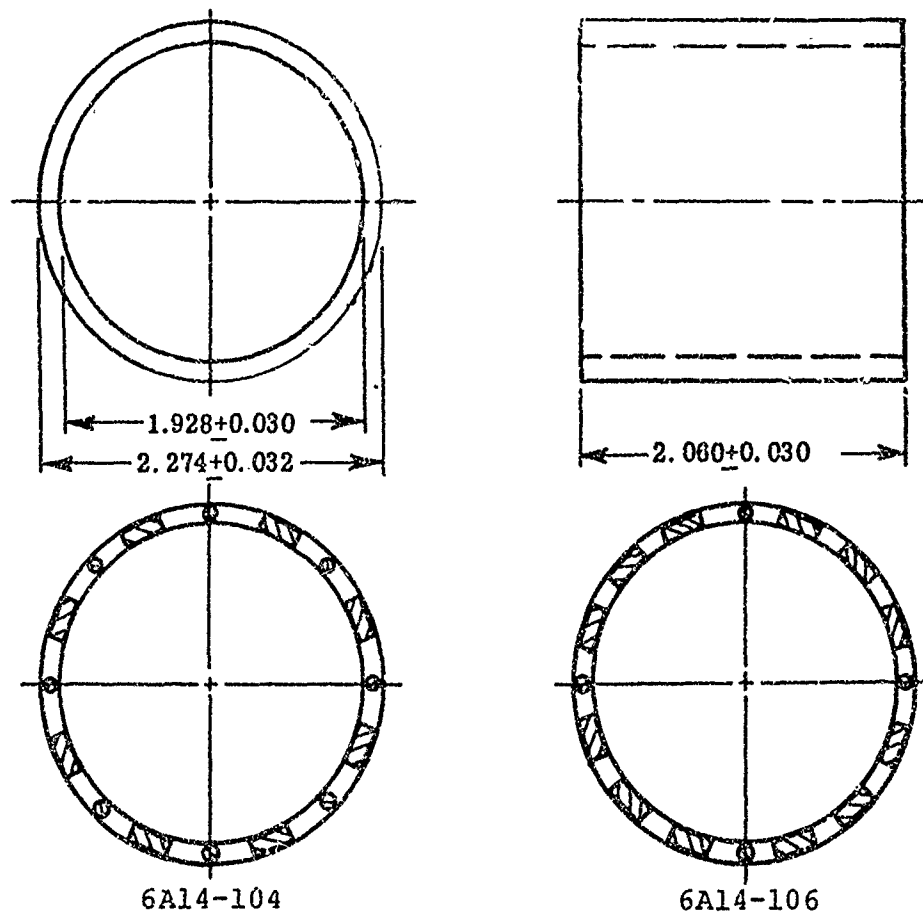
Configuration of Specimen Blanks 6A14 as Received from Coors and Cutting Plan for Removing Phase I Macro Tensile and Macro Flexural Specimens from Blanks 6A14-104 and 6A14-106
